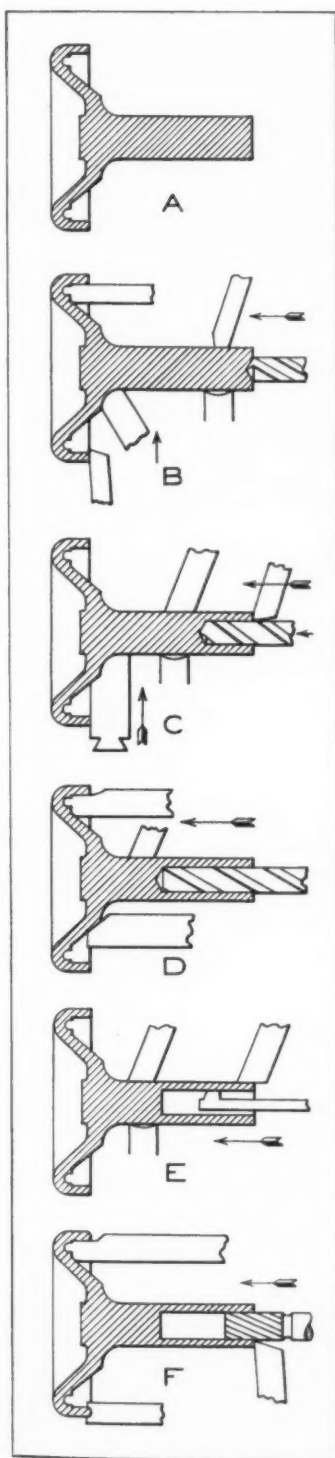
Diagrammatic Illustrations of the Tools Provided on an Automatic Chucking Machine which Finishes the Stem of a Milk Separator Part
